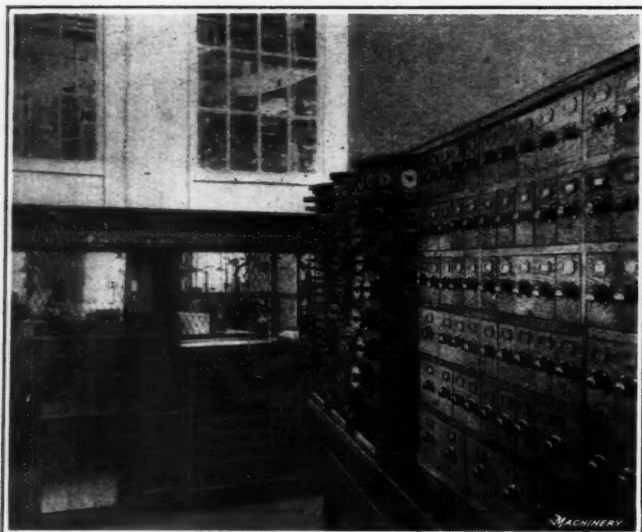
View in Tool Supply Room showing Revolvable Racks for Milling Cutters
